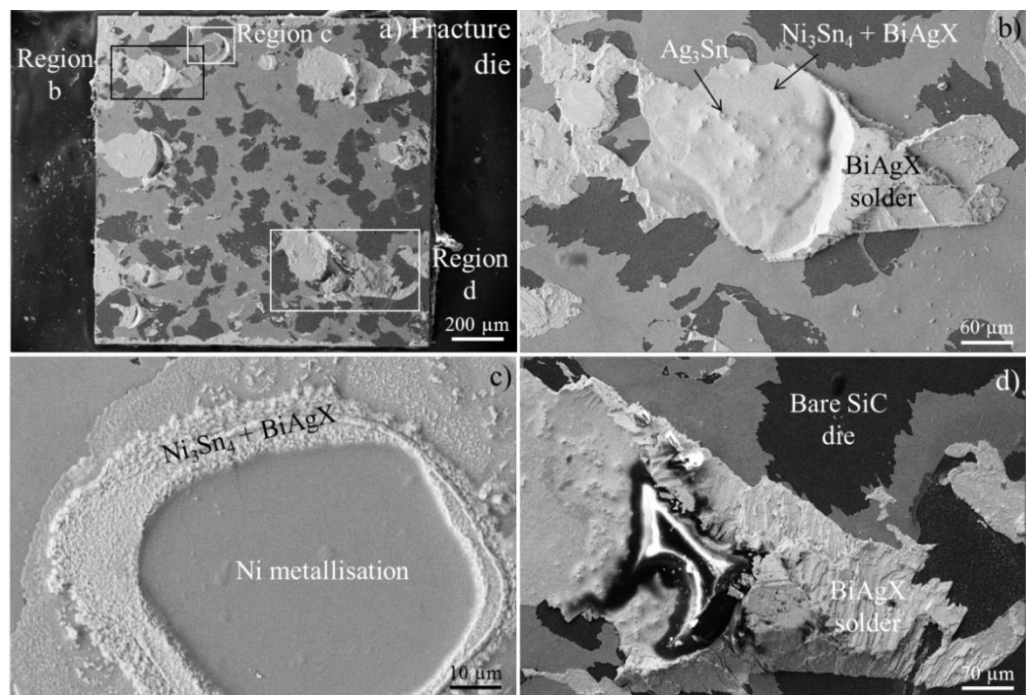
The fracture surface of BiAgX solder joints on SiC die side: a) overview image; b) enlarged image of Region b; c) enlarged image of Region c; d) enlarged image of Region d.
